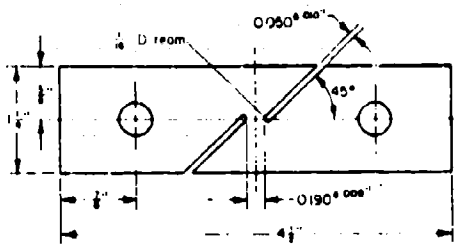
SHEET SHEAR TEST SPECIMEN
